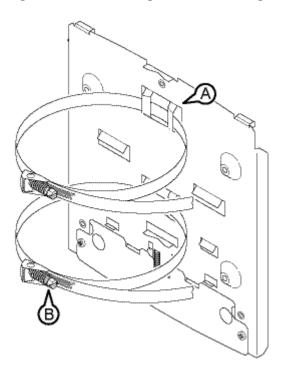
Mounting Plate with Fittings for Mast Mounting
